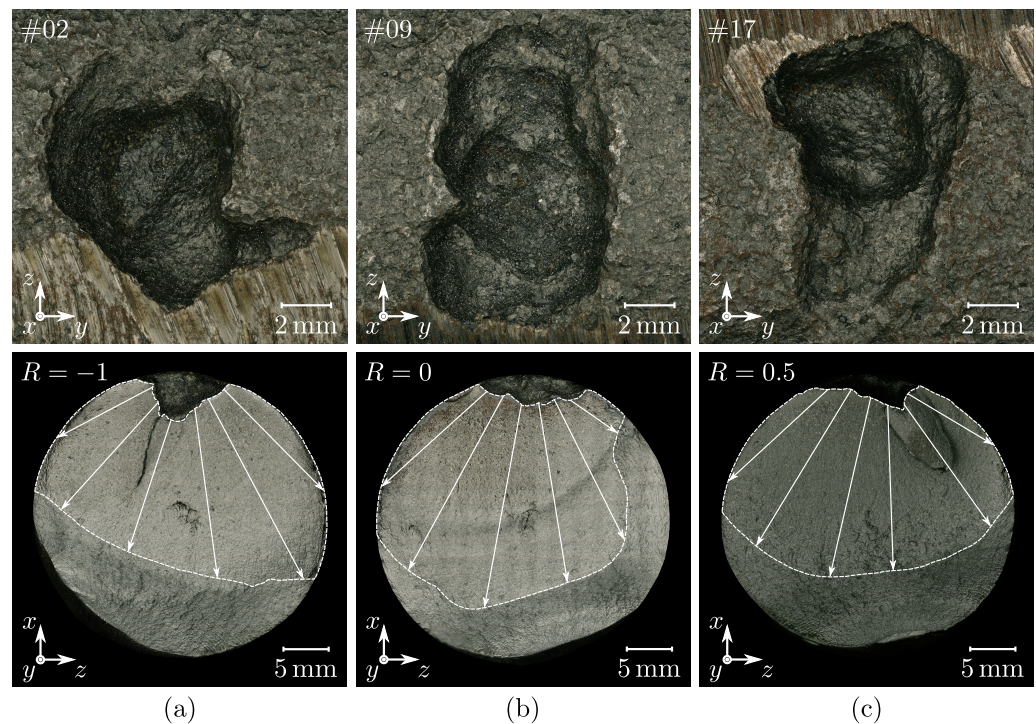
Surface defects and fracture surfaces of investigated large-scale specimens: (a) Specimen #02 tested at $R = -1$. (b) Specimen #09 tested at $R = 0$. (c) Specimen #17 tested at $R = 0.5$.
